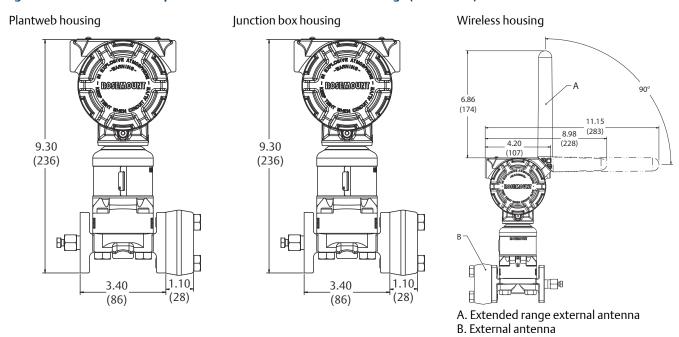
Transmitter with Coplanar Sensor Module and Traditional Flange (Front View)
